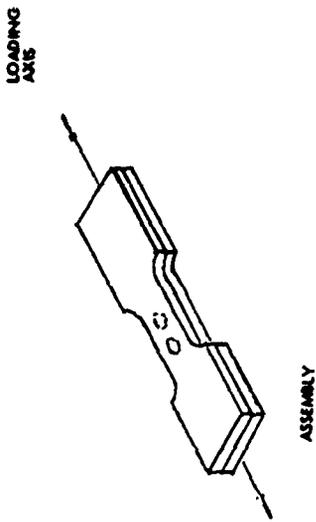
Specimen Detail, Low Load Transfer Test Specimen Joint
